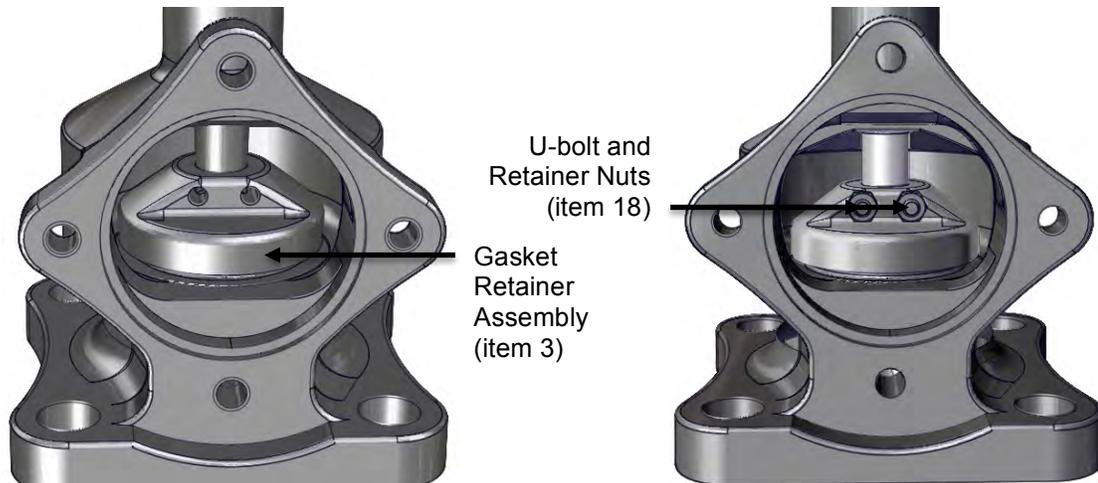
Reassembly Steps 7.2.11 through 7.2.14
